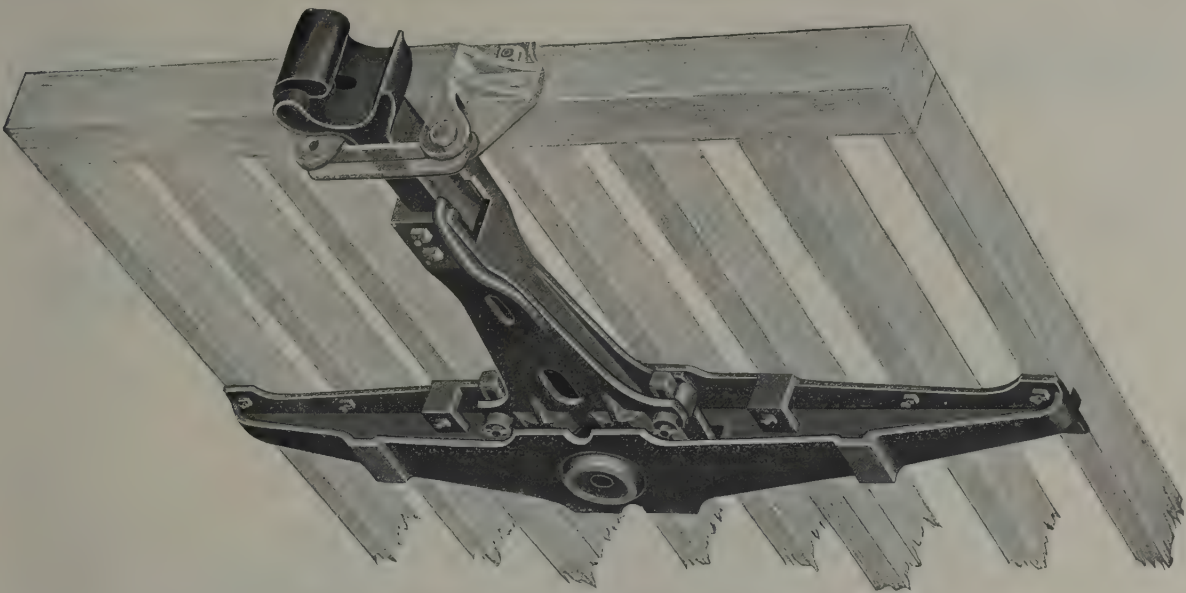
Commonwealth Cast Steel Transom Draft Gear.
